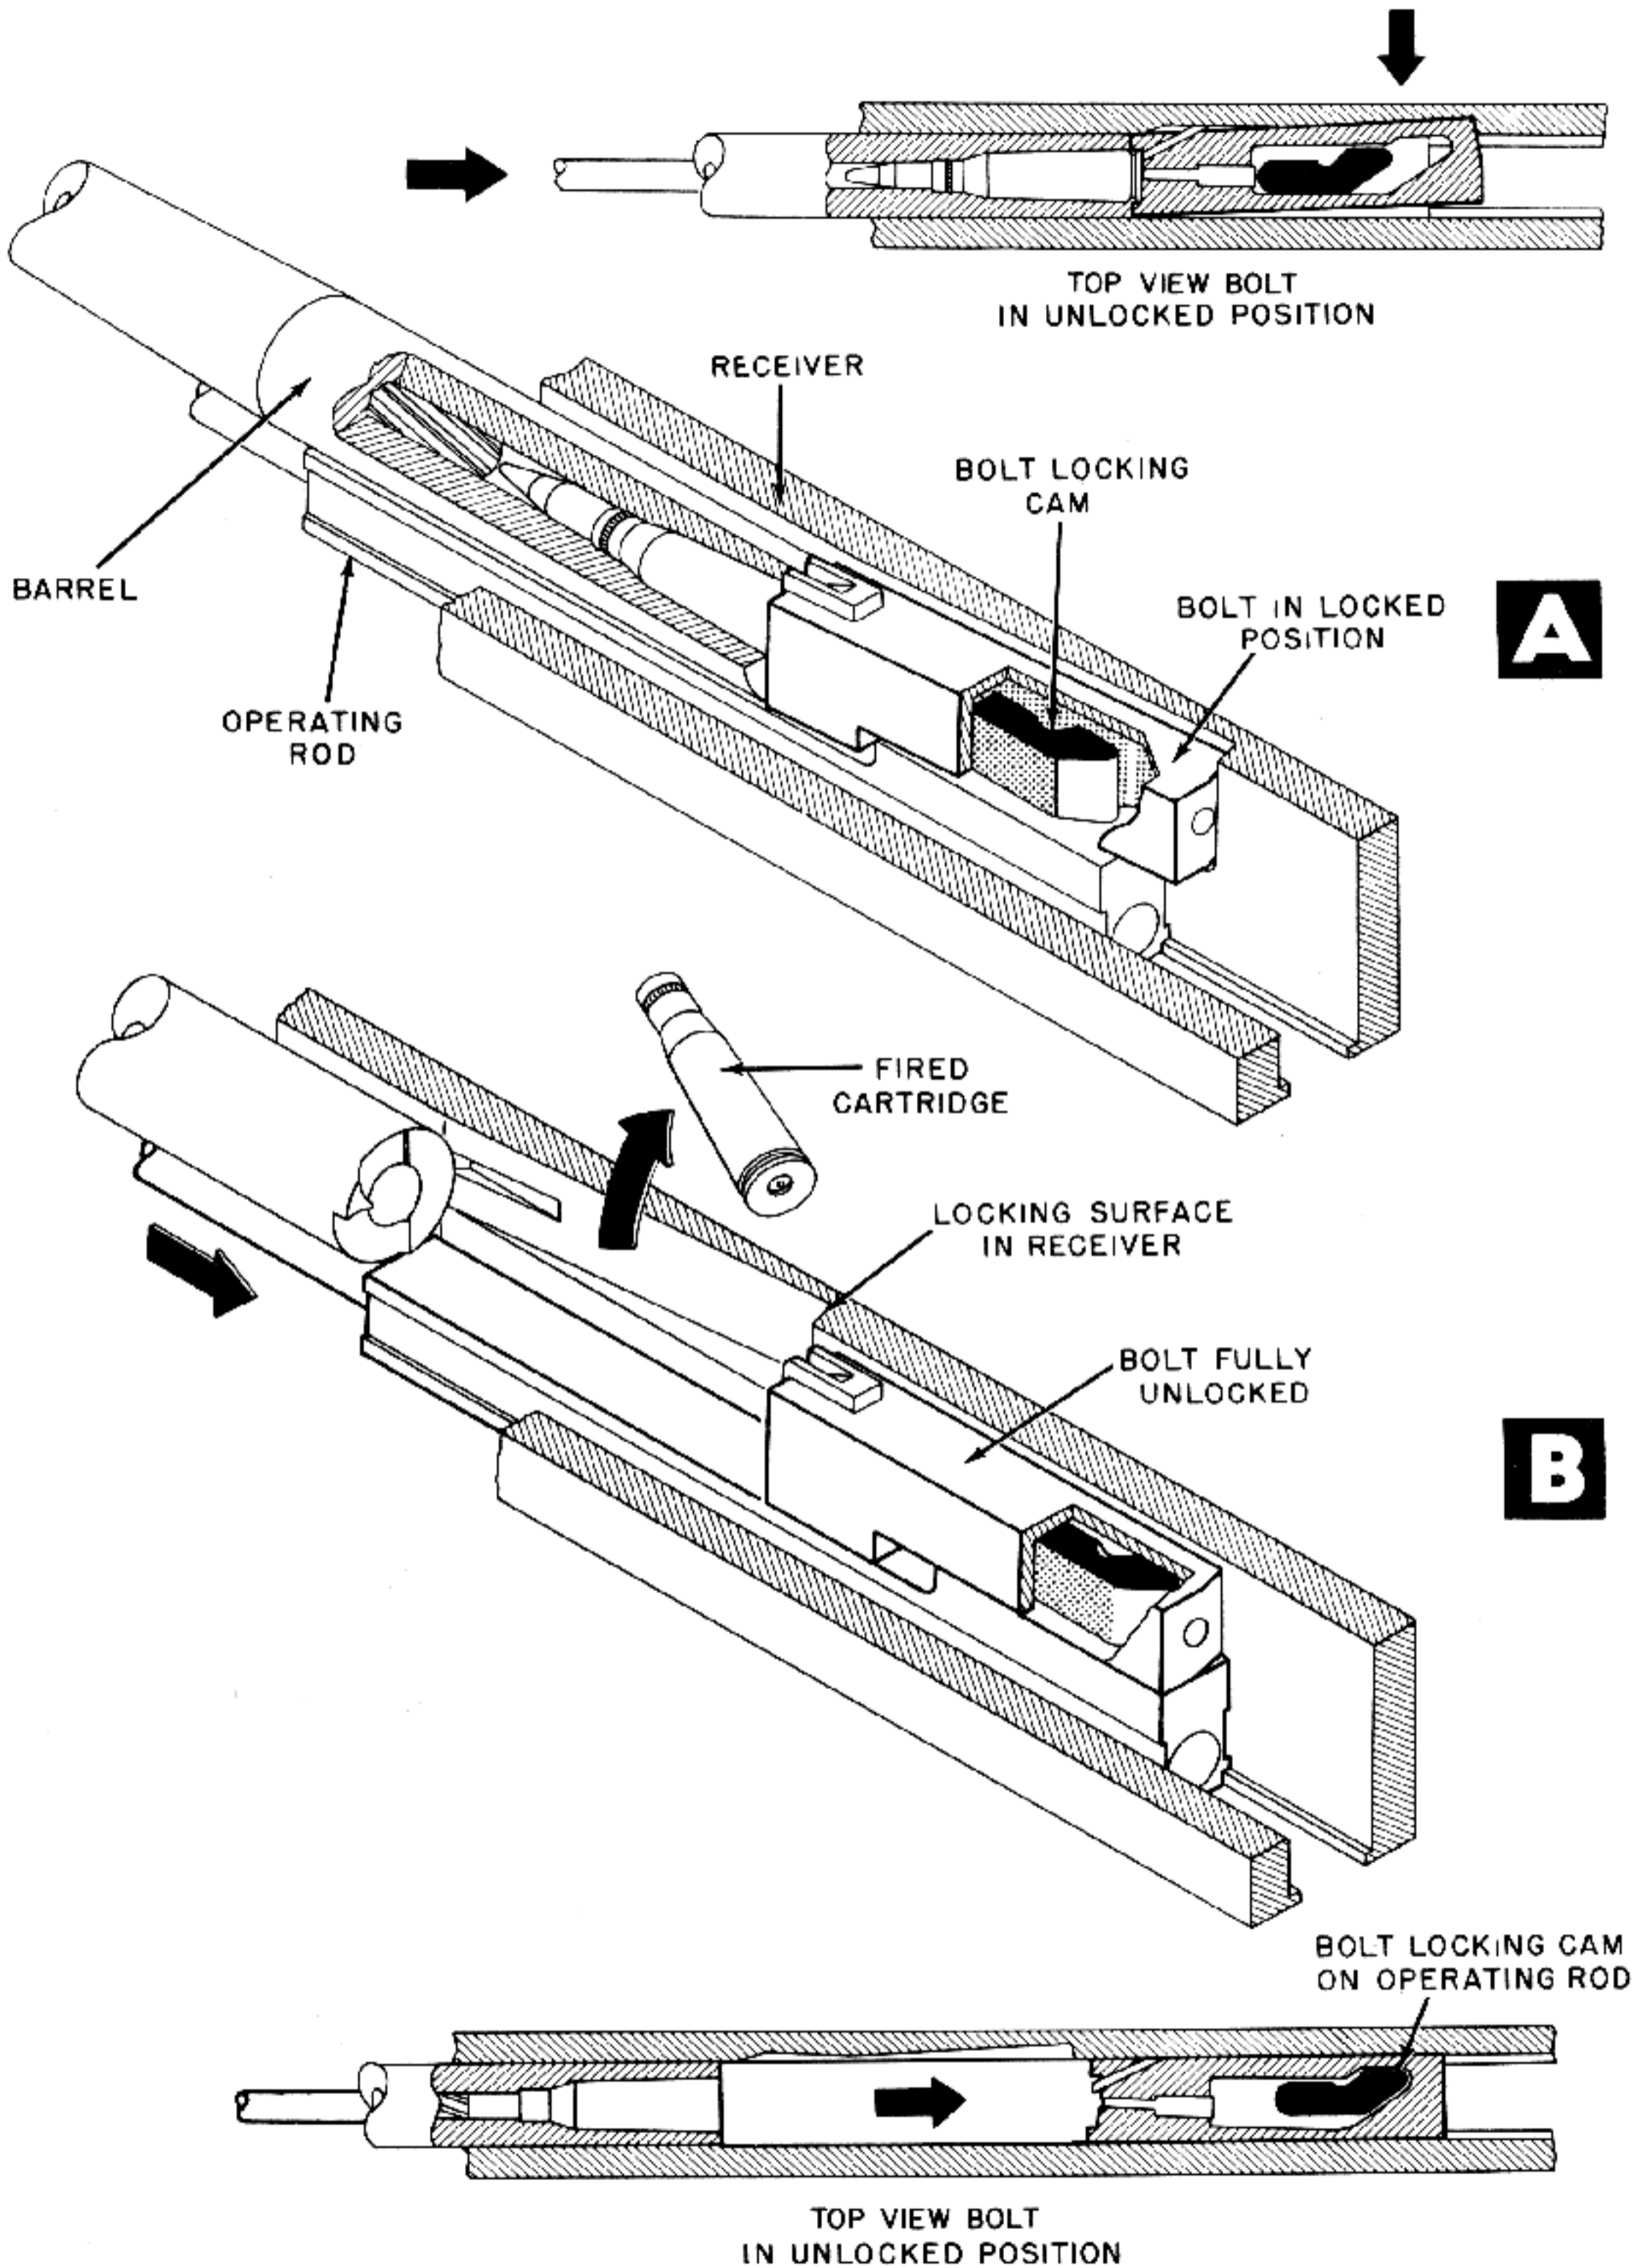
Lug on Operating Rod Cams Bolt Out of Side Locking Surface.
